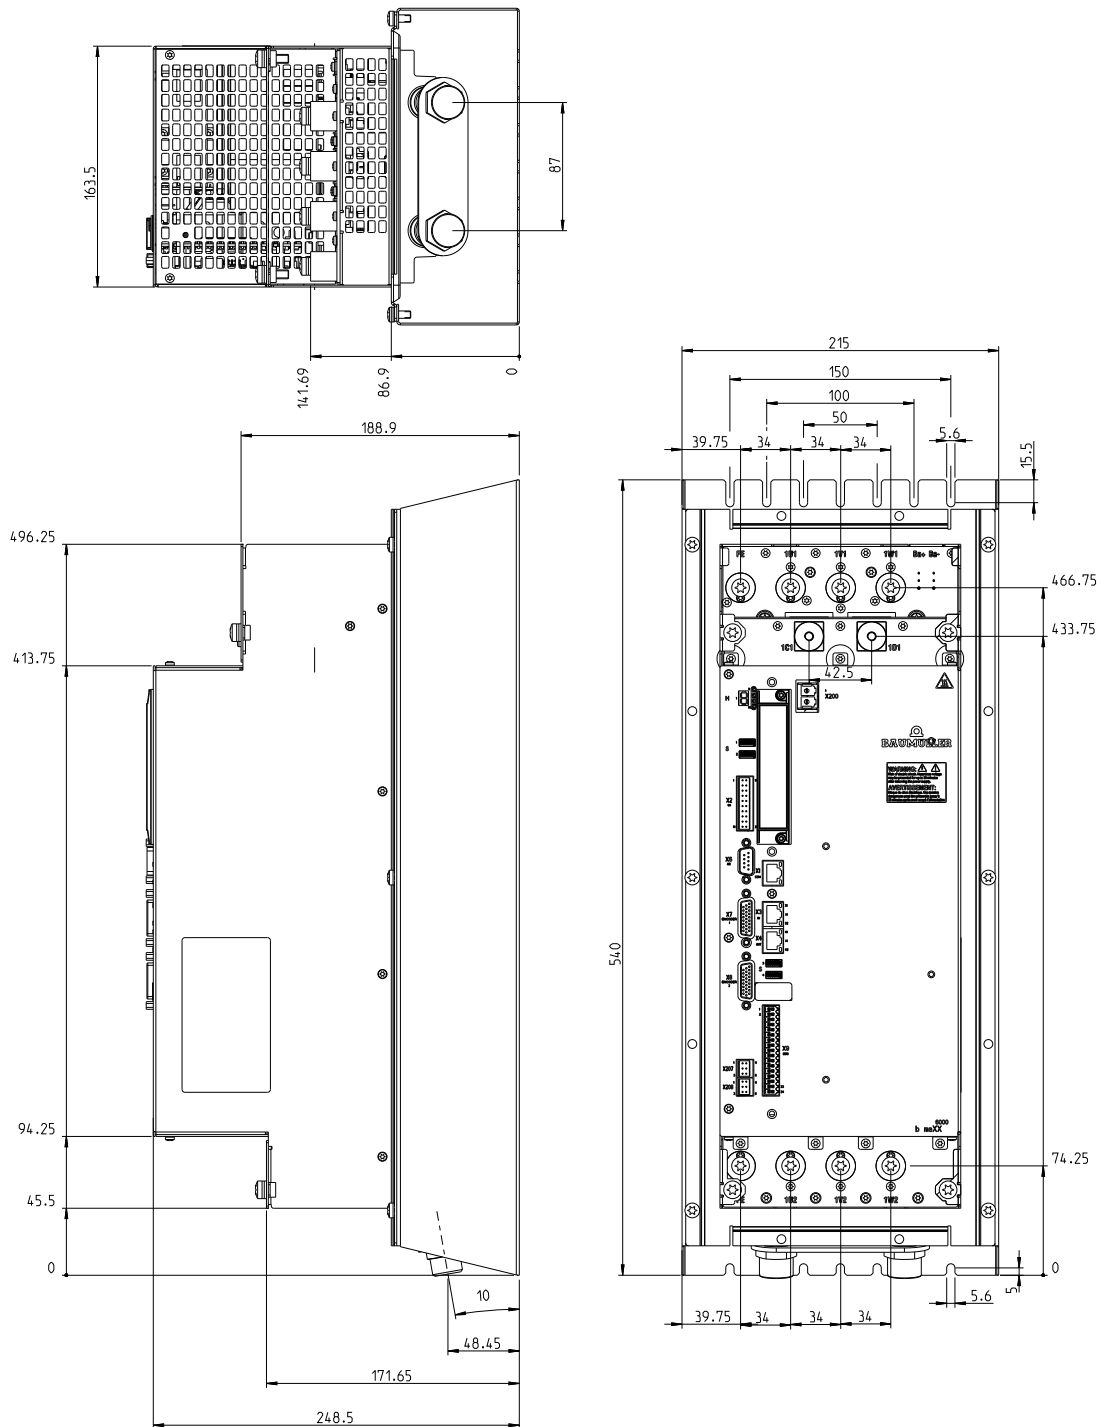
Dimensions BM654X/BM65DX-FXXXXY
